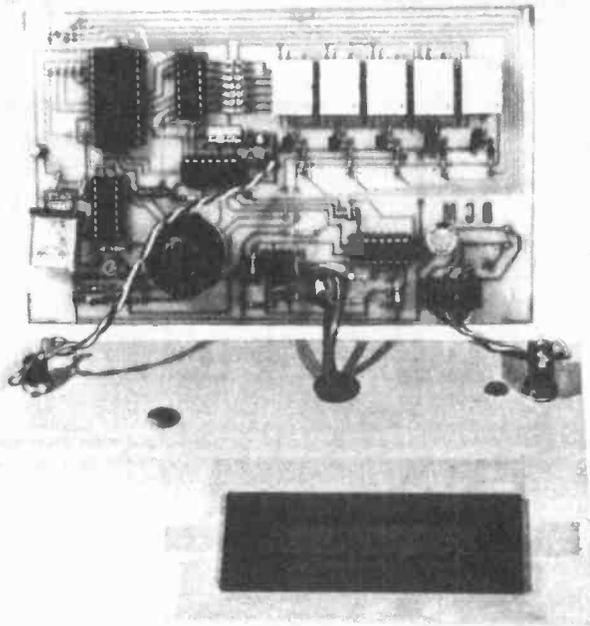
Component layout and wiring. Switches S2 and S3 are p.c.b. mounted. Wire S3 to points shown using insulated wire on the back of the board.
